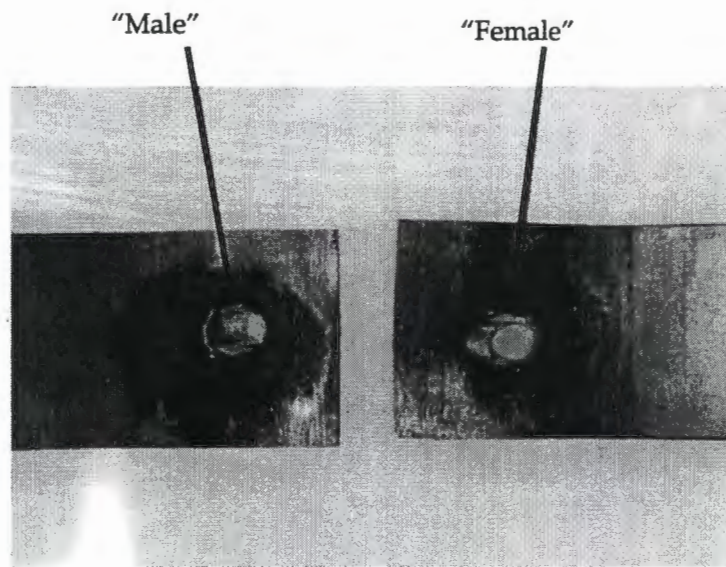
Typical "male" and "female" plug weld nugget failure; magnified 1x.
